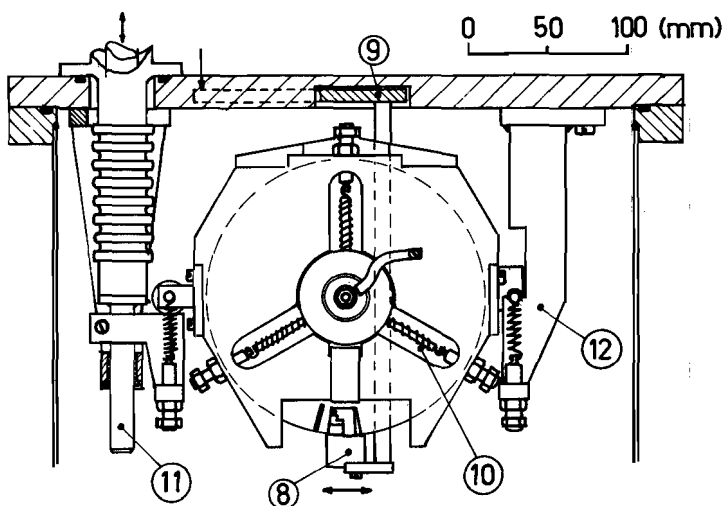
b. Front view of the chopper motor, seen from the detector.
